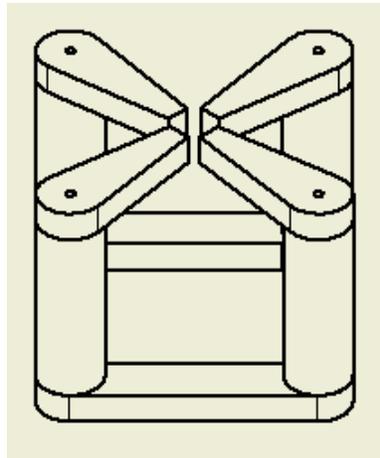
Electromagnet iron core assembly with copper windings removed from vertical columns for easier viewing of assembly
